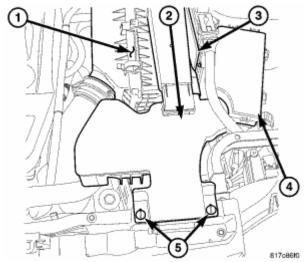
AIR CLEANER INLET Courtesy of CHRYSLER LLC
